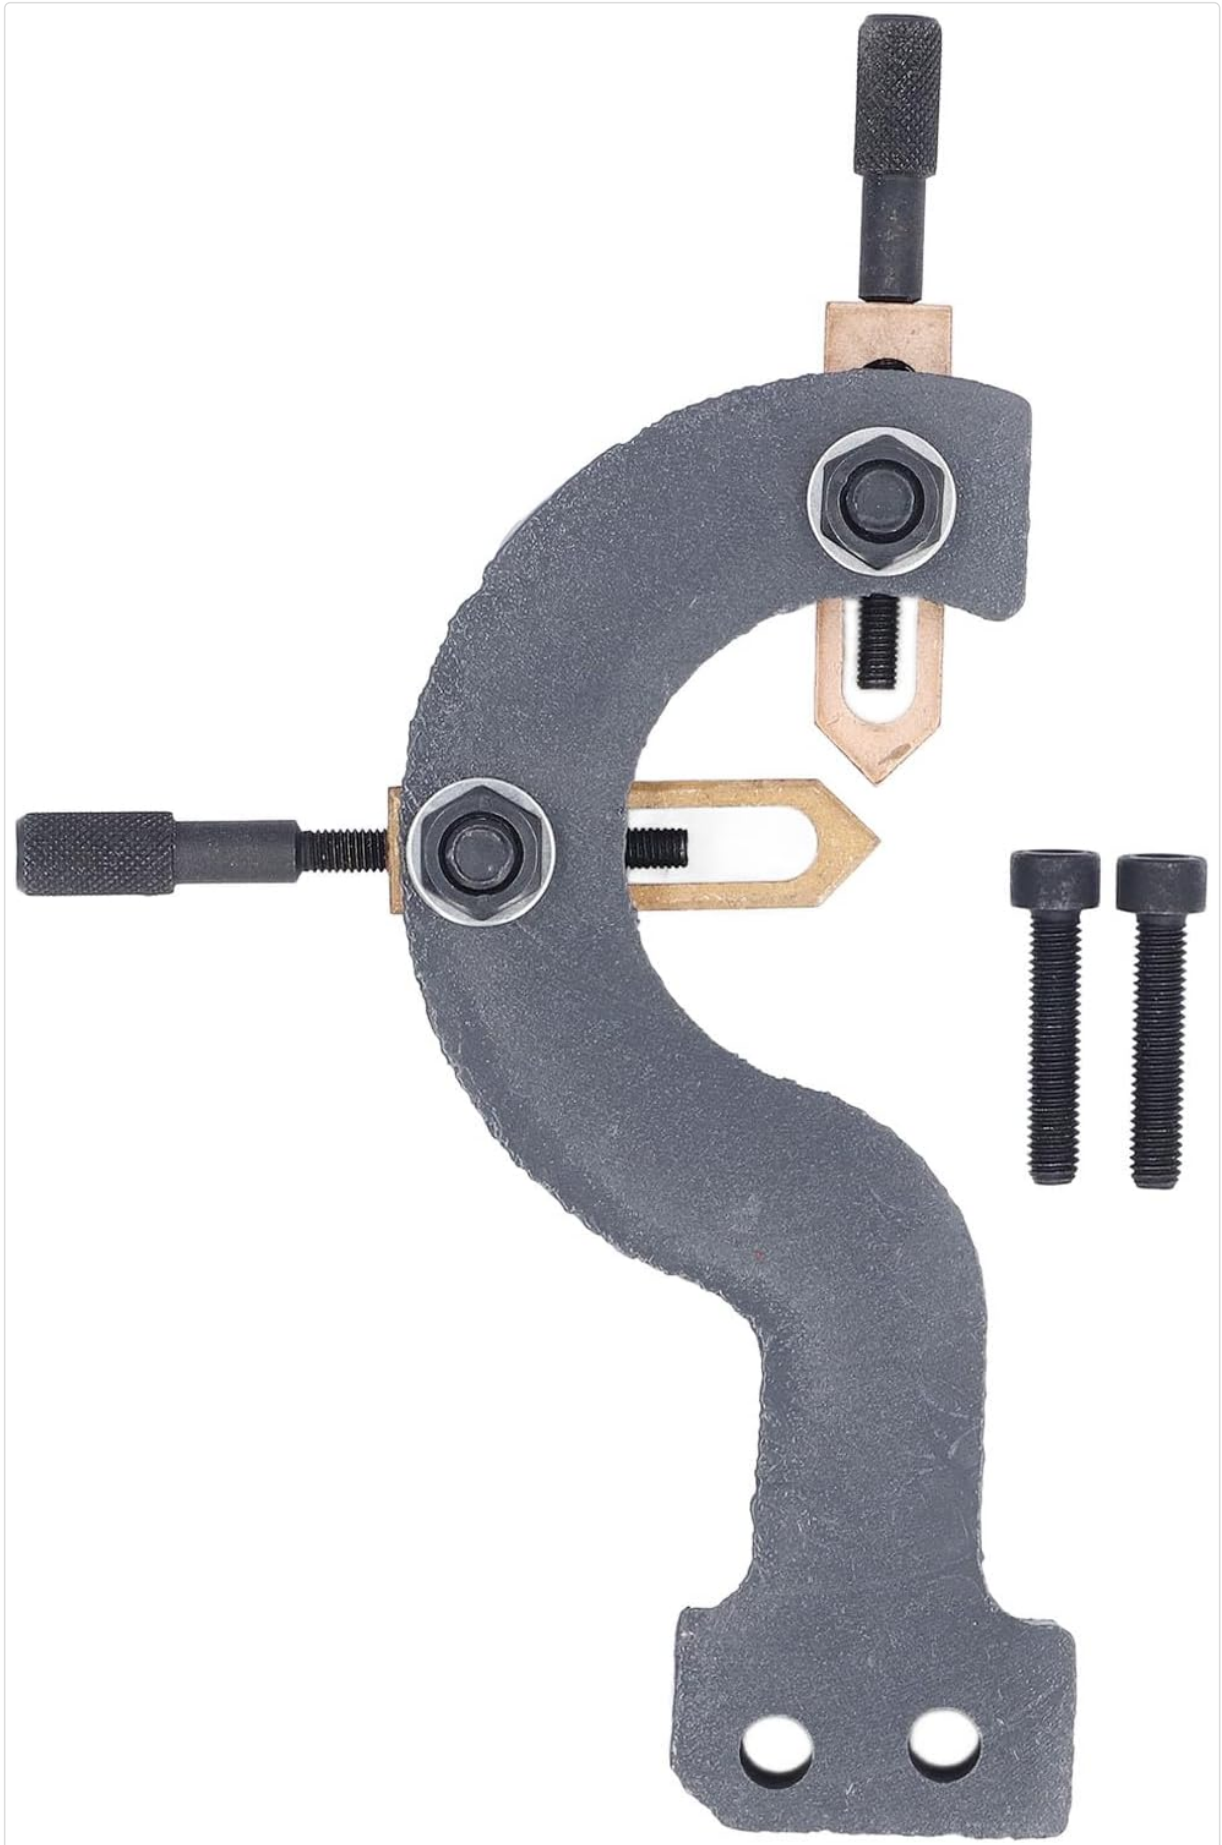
The Mini Lathe Stabilizer shown with the two included screws for mounting.
